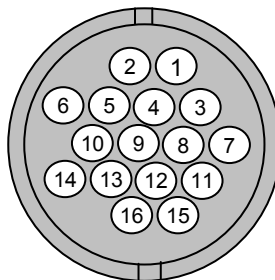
ii: Head Interface Connector (Front view of cable plug)
